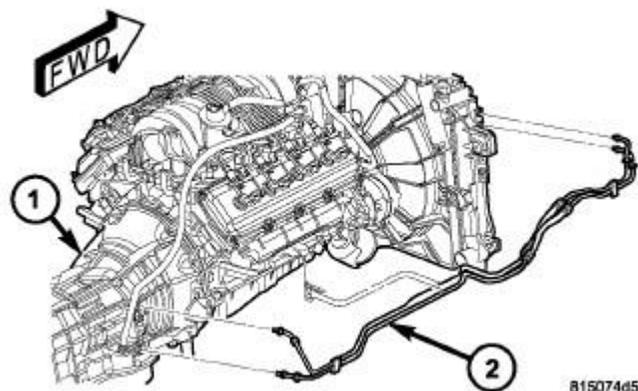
Transmission & Transmission Fluid Cooler Lines
